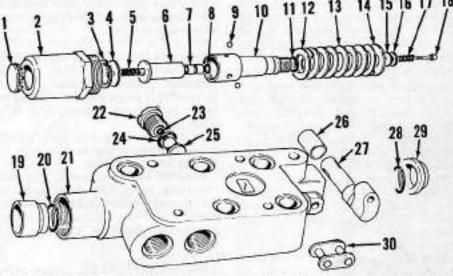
Exploded view of double acting remote control valve showing component parts and their relative positions.
